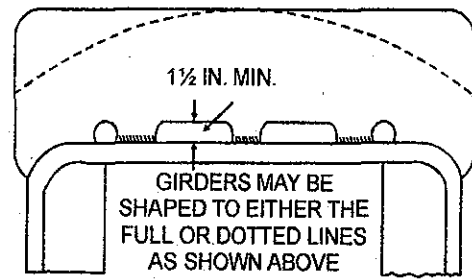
TYPICAL METHODS OF FITTING WELDED GRINDERS TO WELDED COMBUSTION CHAMBERS AND FIREBOXES
